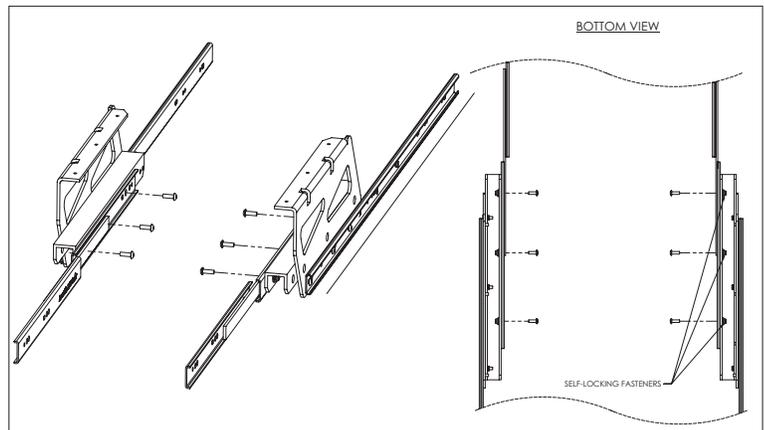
Figure B. Fully extend the keyboard slides to access the mounting holes for the self-locking fasteners.
